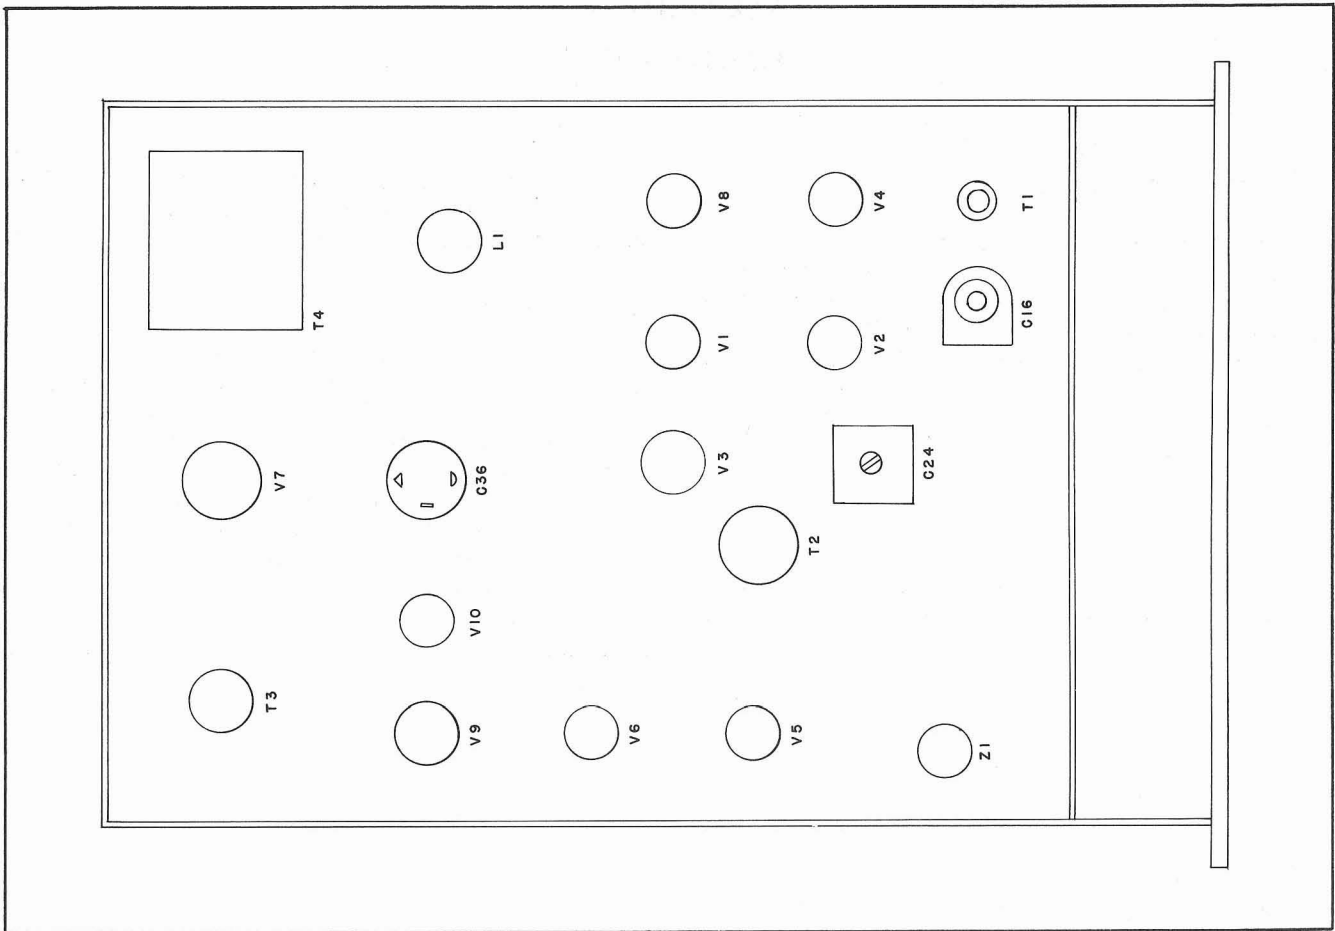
Bottom View, Inside of Chassis, Model GSB-1.
